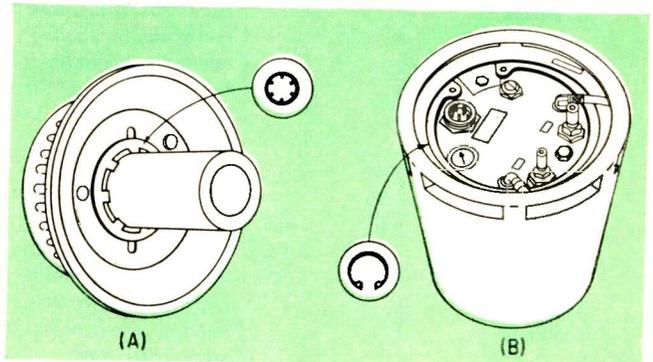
Knob assembly (A) uses circular self-locking ring to position and lock dial skirt on plastic knob shaft. Push-on type ring is installed without groove, accommodates tolerances of plastic parts to eliminate end play. Portable industrial X-ray unit (B) uses beveled external ring to lock end plate of transformer tube housing
